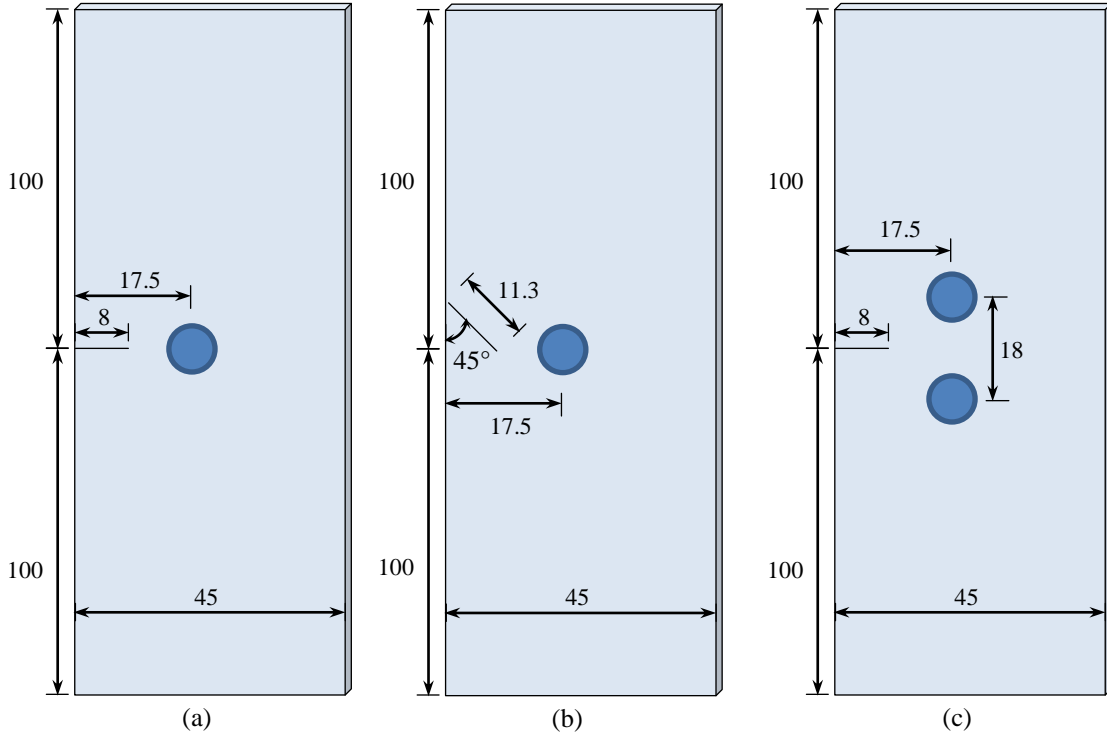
Specimen geometries for various specimen configurations (all dimensions are in mm)
